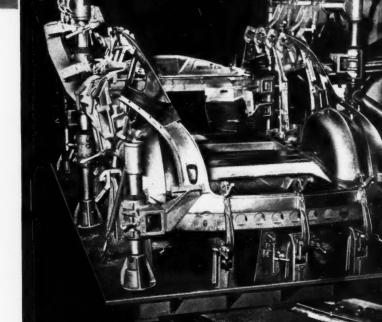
Conveyorized Body-structure Assembly Fixture Used in Welding Together the Roof, Side Panels, Cowl, and Completed Under-body to Form the Integral "Monobilt" Body-and-frame
